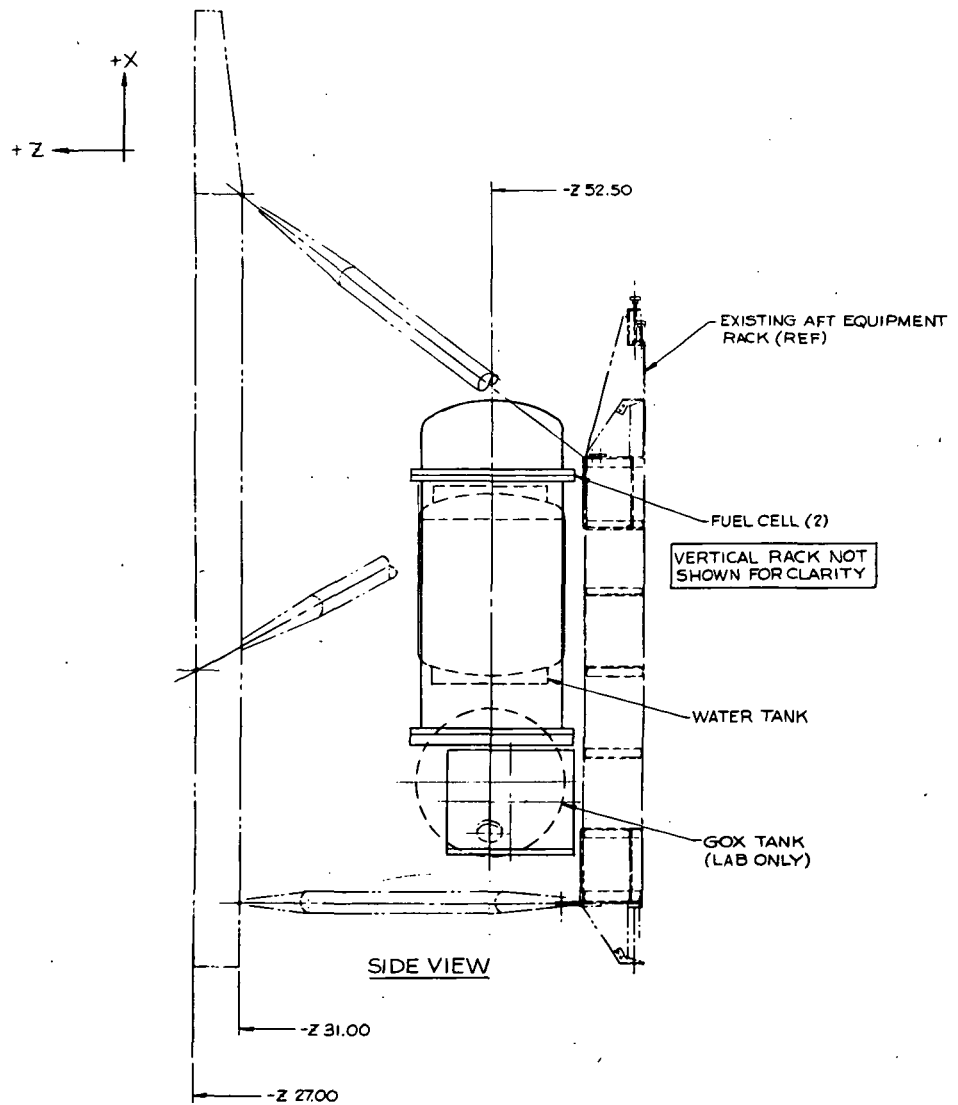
Structural Arrangement - Recommended O₂ Tank
